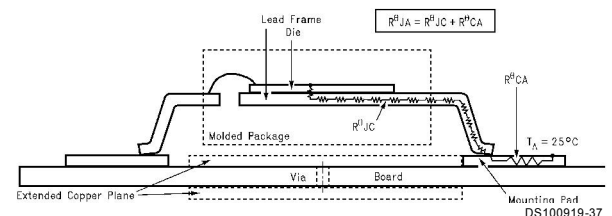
Cross-sectional view of Integrated Circuit Mounted on a printed circuit board. Note that the case temperature is measured at the point where the leads contact with the mounting pad surface
